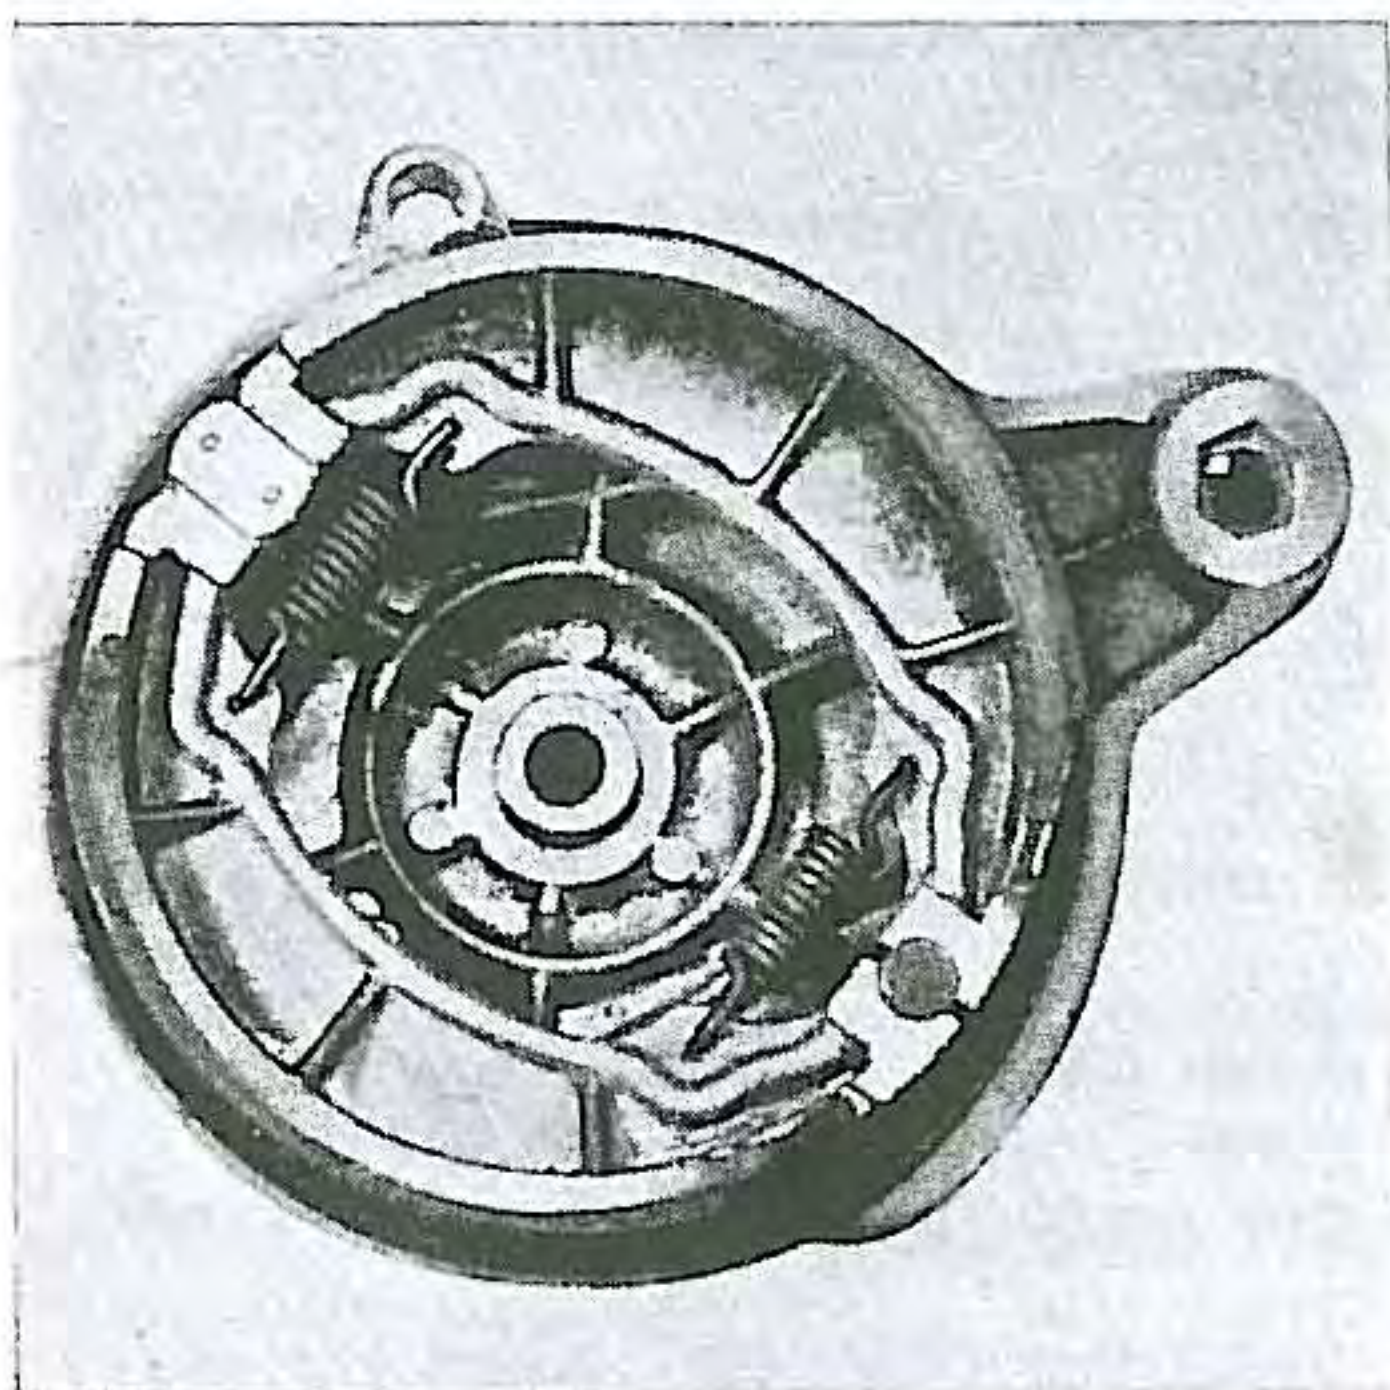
Rear brake shoes and panel (C92 & CA95)
